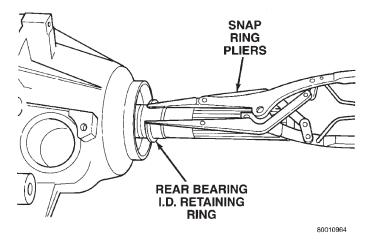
Rear Bearing I.D. Retaining Ring Removal
